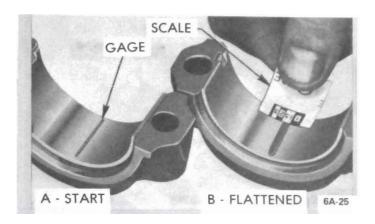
A-18 Checking Bearings with Plastic-Type Gage
